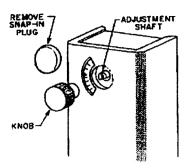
Drawing showing snap-in plug removed and the knob in line to assemble. Press the knob onto the slotted shaft.
